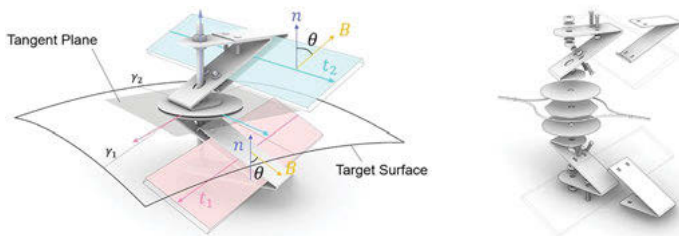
Alignment of connector with respect to the given surface (left) and exploded view (right).
